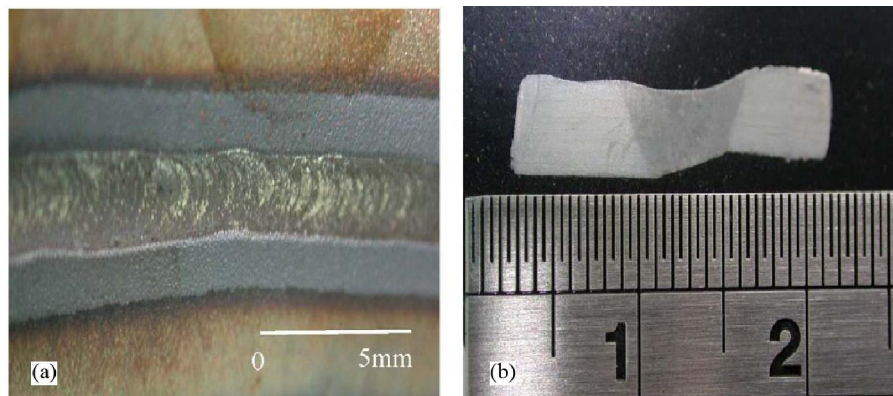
(a) Macrograph of a grooved weld at 9 O'clock location (upward). (b) Fusion zone section at 9 O'clock [9]
